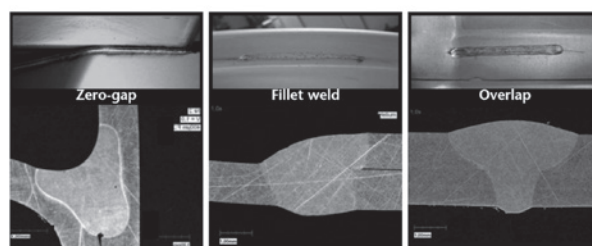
Diode laser welds for a trunk lid and a door inner⁷⁾.
